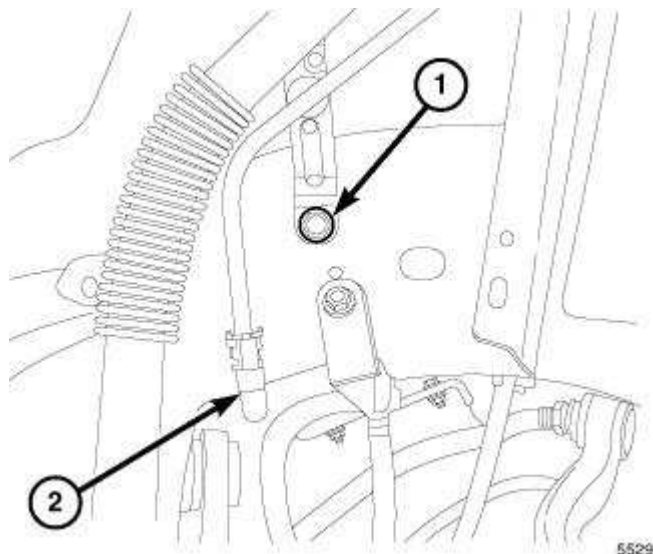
Filler Tube Vent Line And Mounting Bolt
